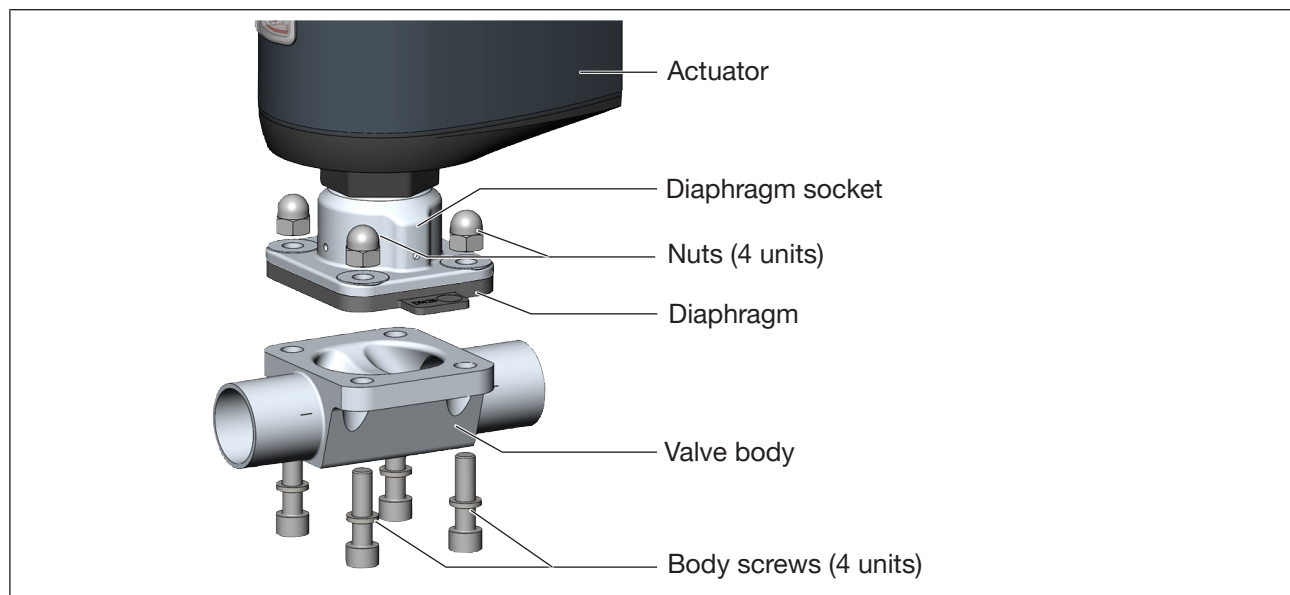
Disassembly of the diaphragm using the 2-way body as an example
